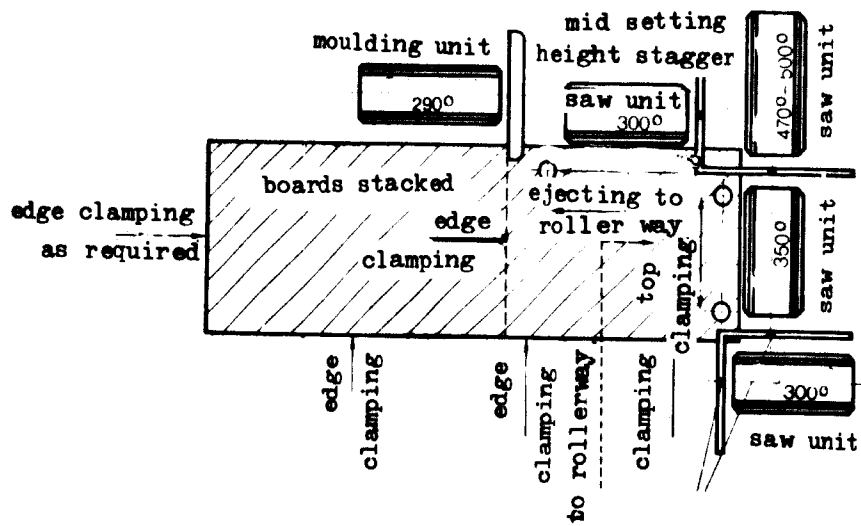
The units run at 3000 RPM. Sawing and moulding tools are mounted directly on the motor shafts. Drive and clamping functions all pneumatic.
